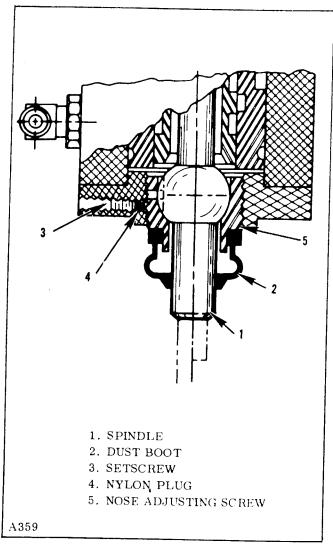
Location of Adjusting Screw in Tracer Valve
